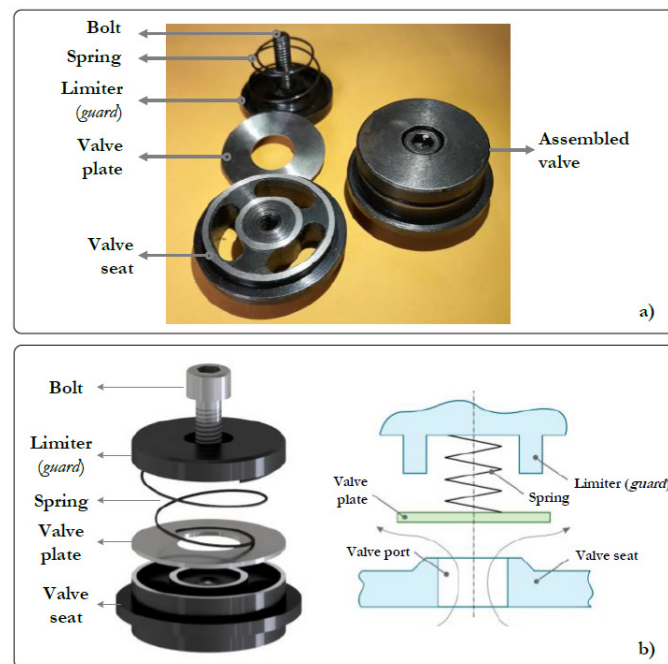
(a) Parts of the valve; (b) scheme of the assembly form.
